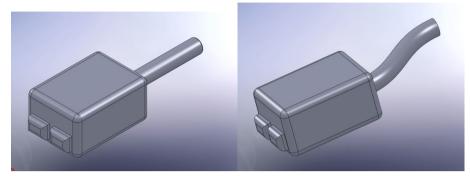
Instrument design-receiver PHF-23853-000 8mm and 8mm curved tube
